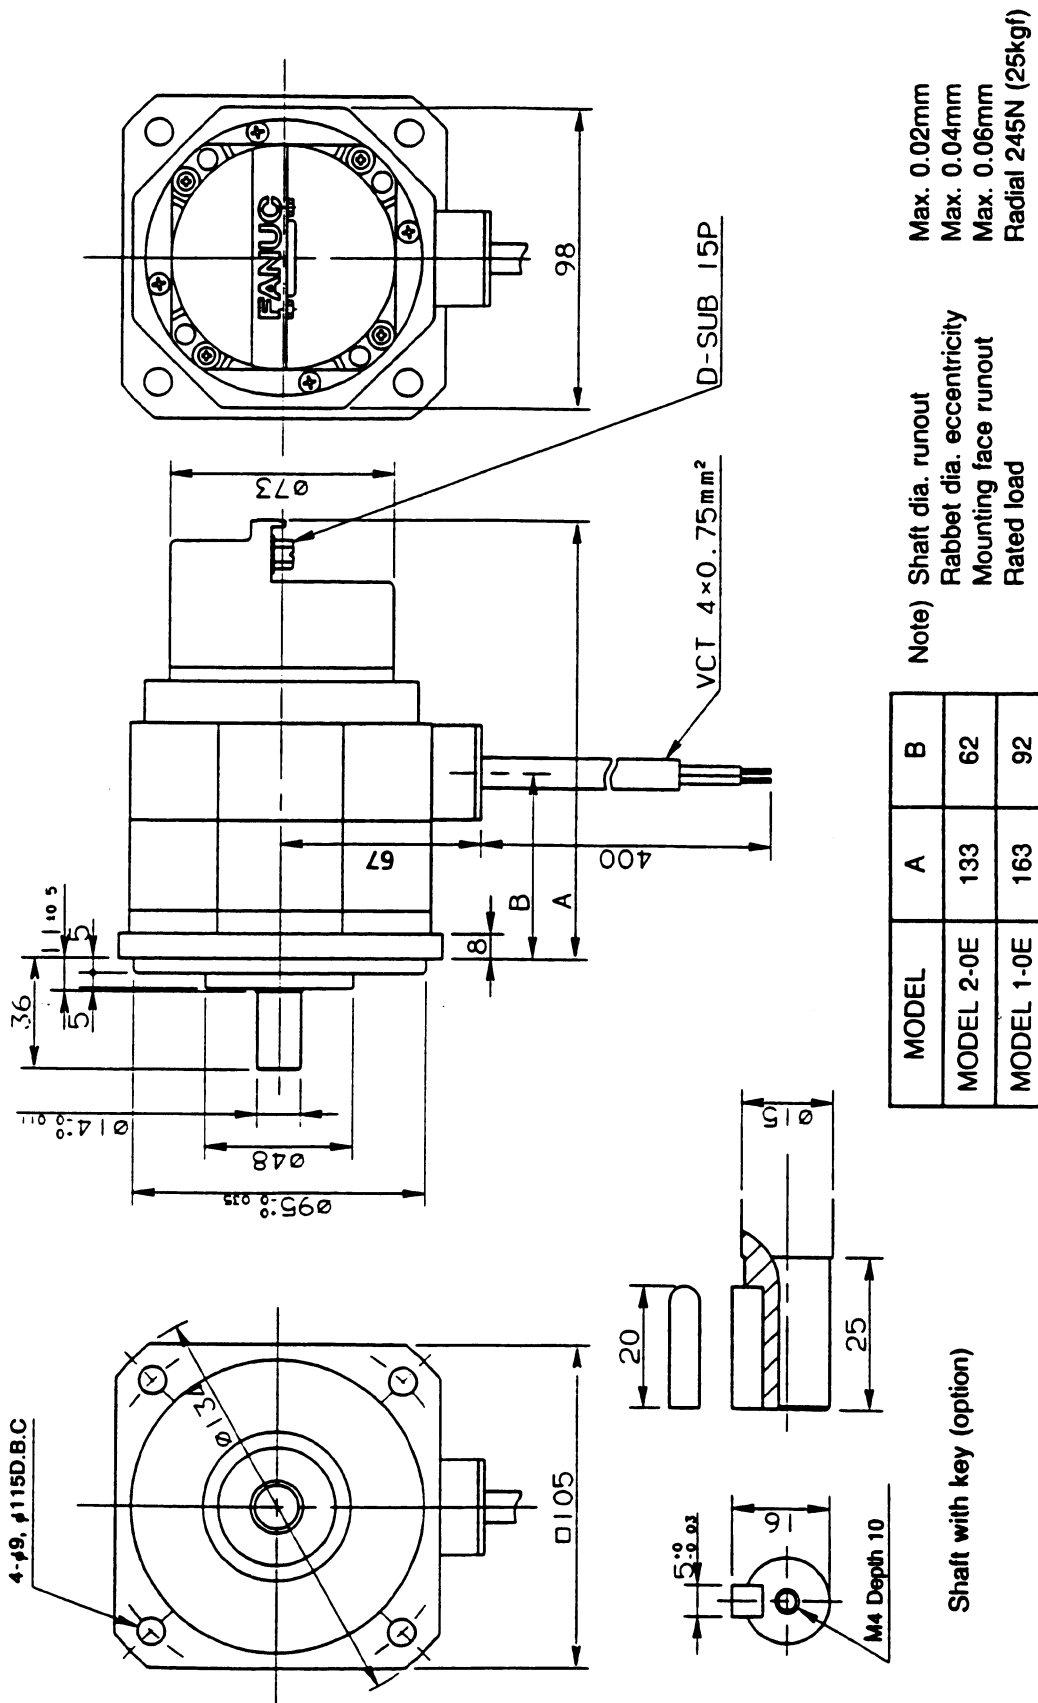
(c) AC Servo Motor 2-0E, 1-0E External View
